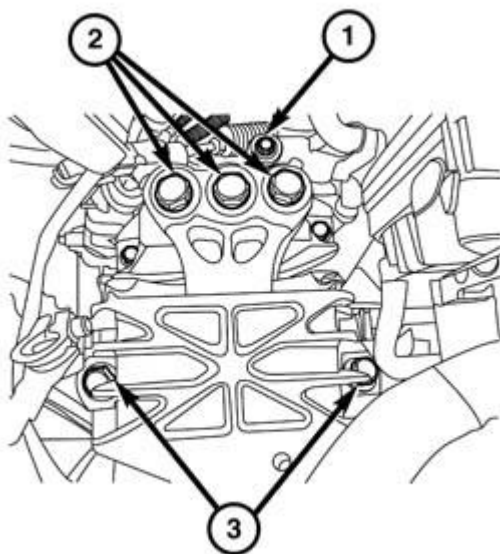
Coolant Tube Bracket Bolt, Transaxle Bracket Bolts & Frame Rail Bolts
